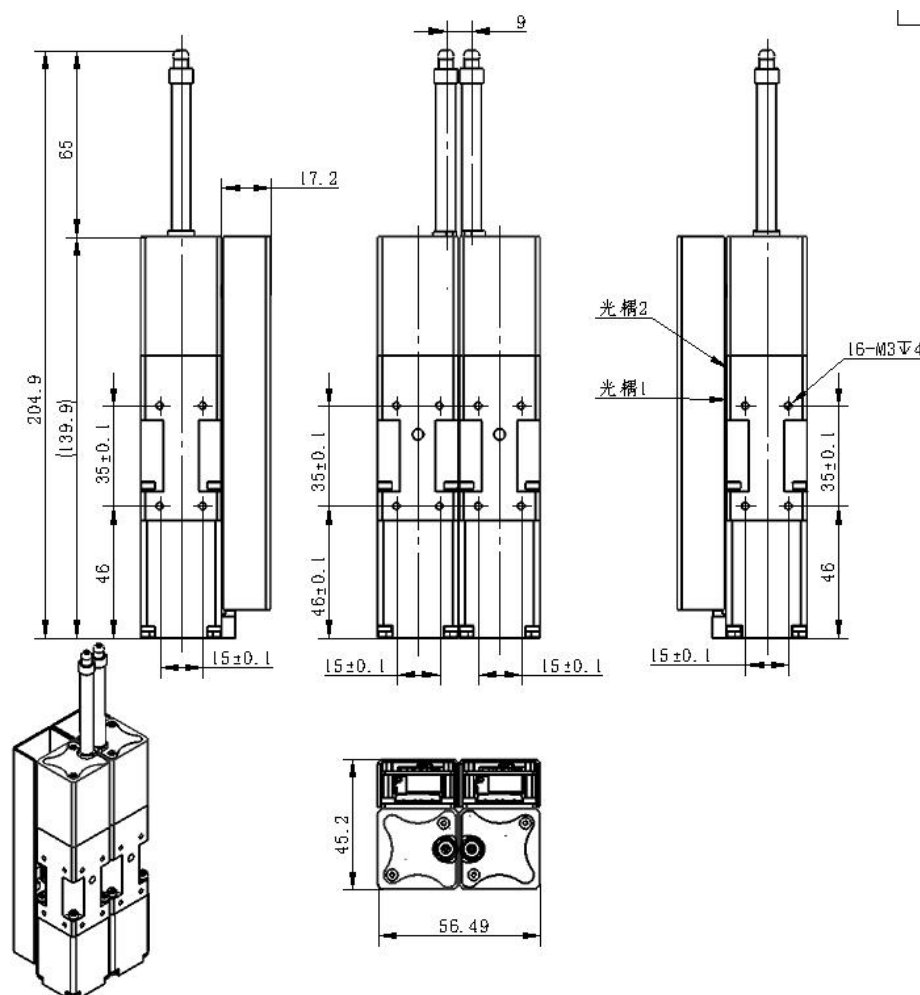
SP28 Design 5 dimension and mounting Figure
